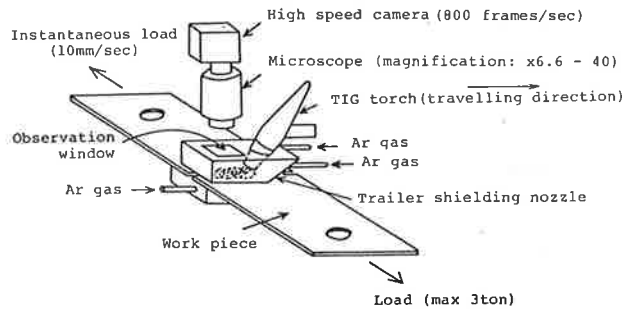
Illustration of arrangement of equipments in the MISO technique combined with tensile hot cracking test
